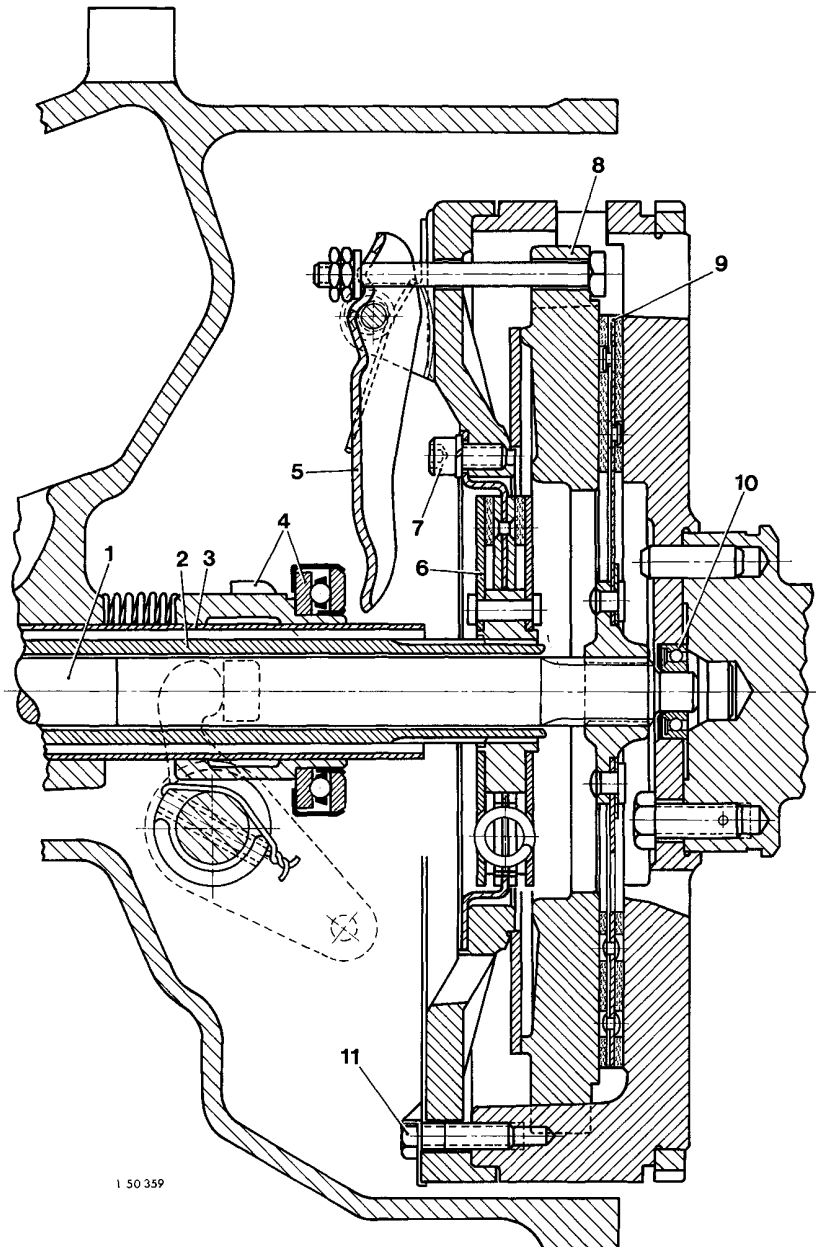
Engine Single-Stage Clutch, Sectional View
